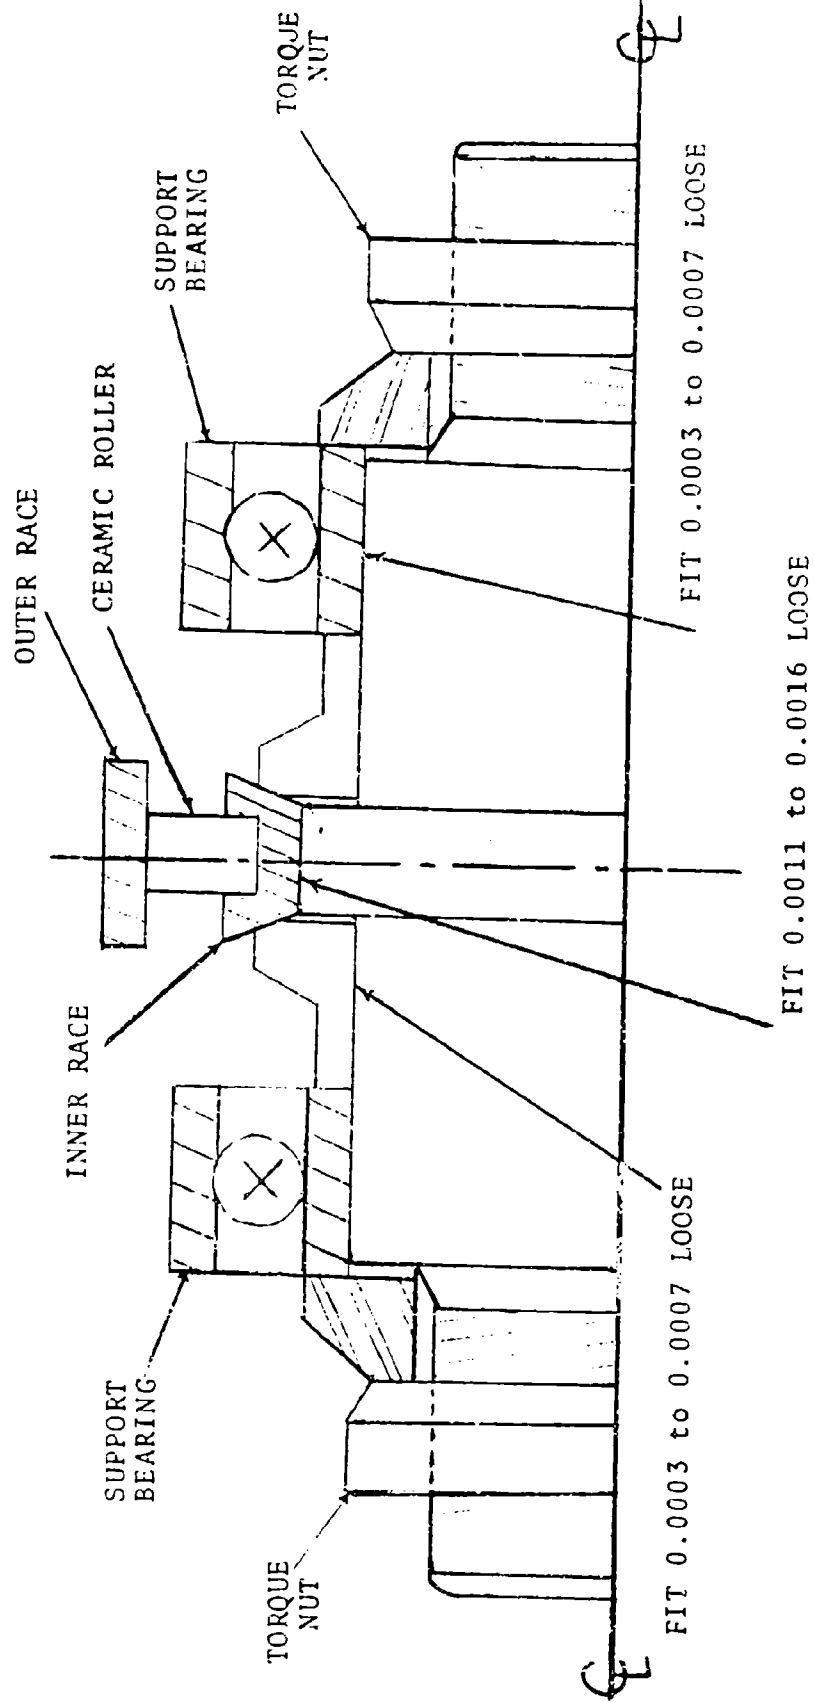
Method Used to Hold Ceramic Race to Shaft
